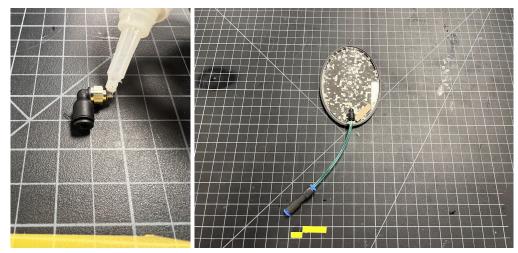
Application of CA glue to right-angle connector, and a completed assembly of a bubble module
